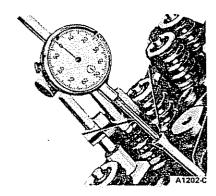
Typical Camshaft Lobe Lift Hydraulic Valve Lifters—V-8 Engine
